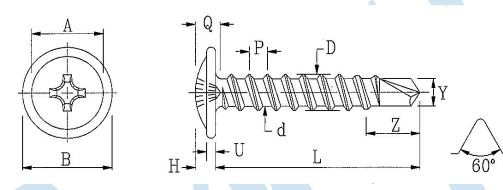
S.D.S. Phil Modi Truss Type BSD # 3PT
